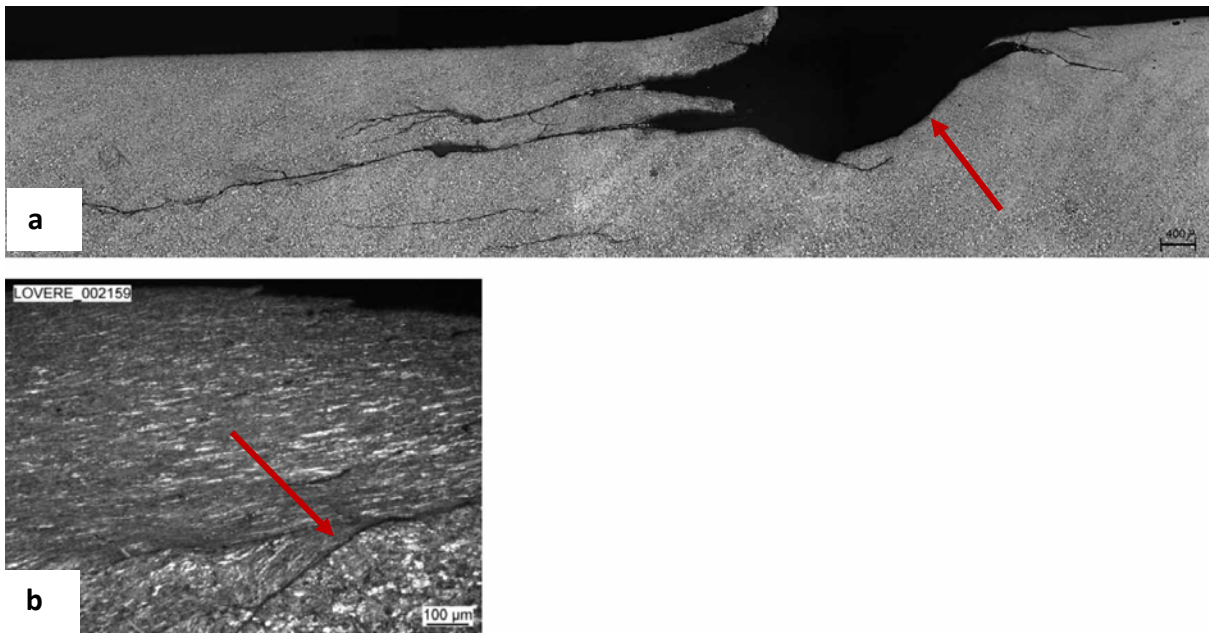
(a) Transversal section of typical rolling contact fatigue (RCF) damage on the tread of solid wheels, (b) severe plastic deformation with subsurface-initiated cracks. This is an example of shelling [11]
